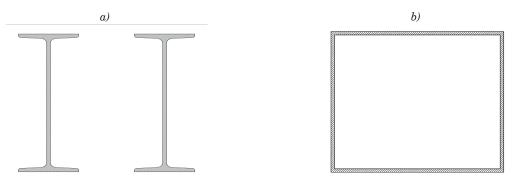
Section of the center sill of the tank car frame a) standard; b) improved
